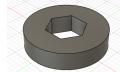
Disc for Driving the Shaft (Hex Bolt)
